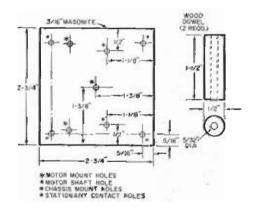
Fabricate the rotary switch on a  $2\frac{3}{4}$ " x  $2\frac{3}{4}$ " piece of Masonite and bolt it to the chassis using two  $\frac{1}{4}$ "-long dowels and 2"-long screws.
